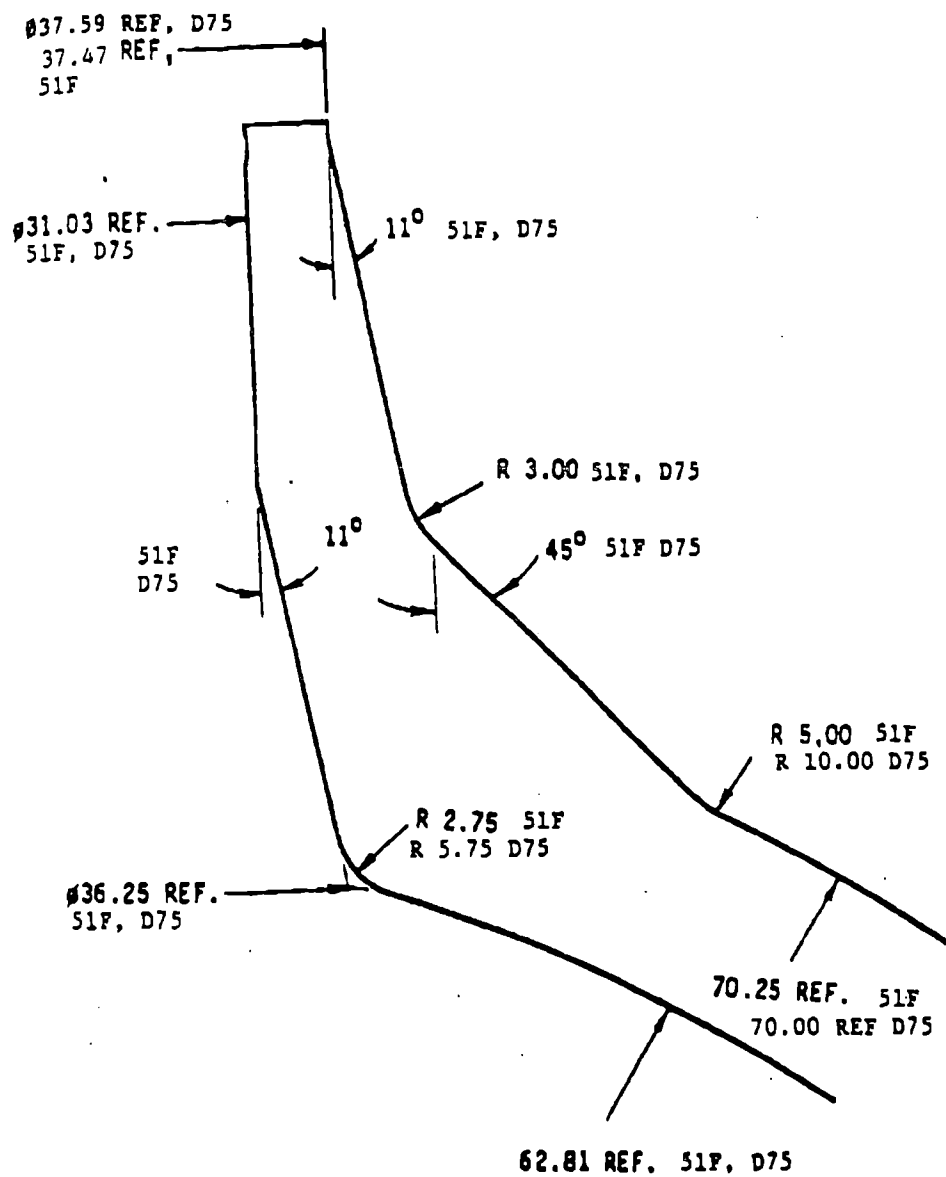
Geometry of a Typical Steam Generator Primary Nozzle.
